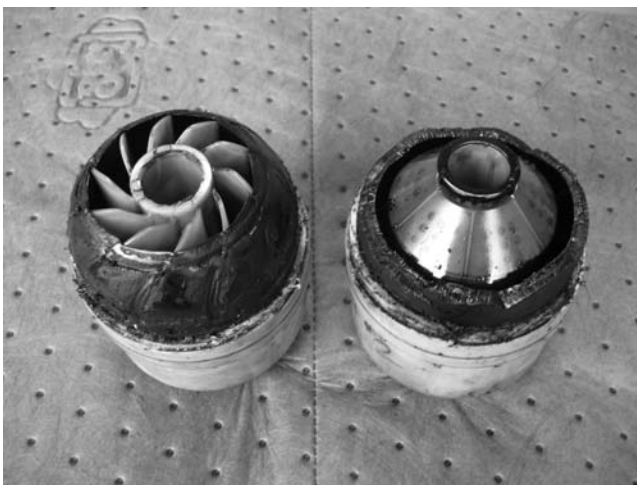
Soot collected inside of centrifuge rotors (sectioned view).
